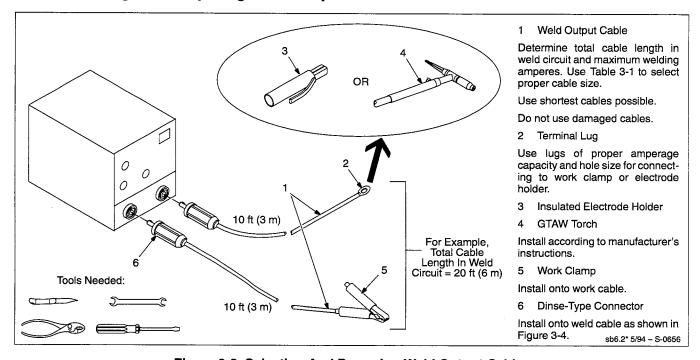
Selecting And Preparing Weld Output Cables
